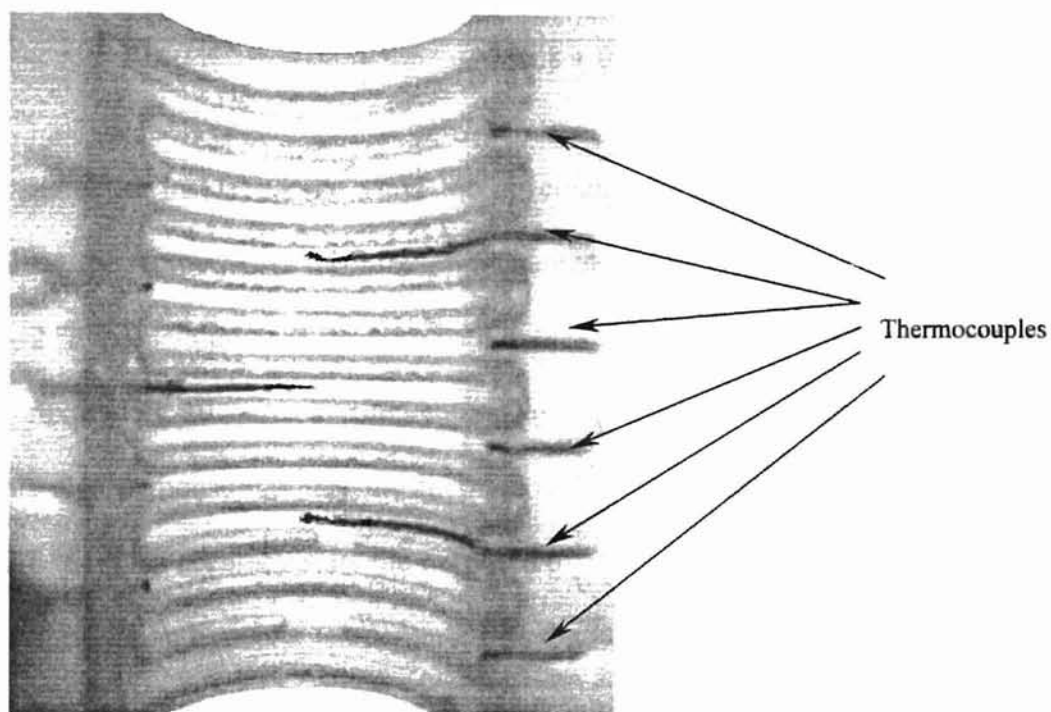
Imbedded thermocouples and HX tubing into upper half of curing fixture
